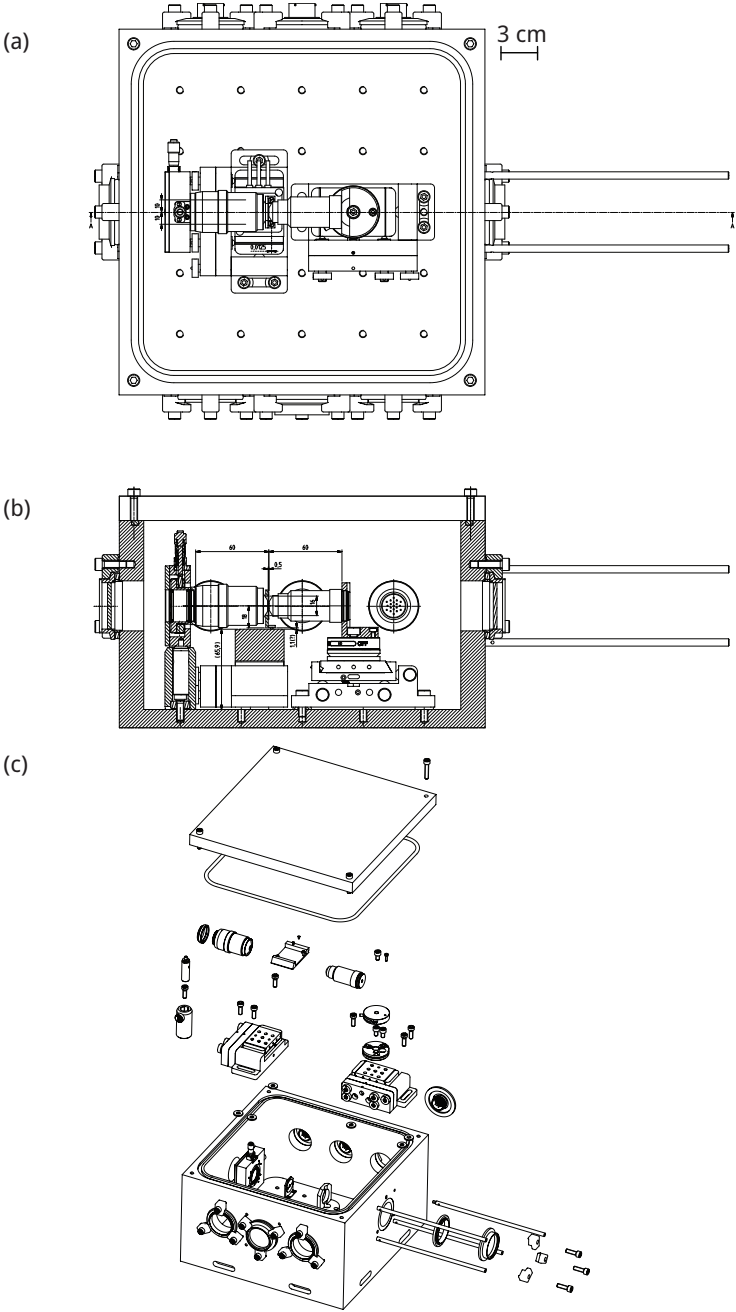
Schematic of the nano-optomechanical measurement setup.
